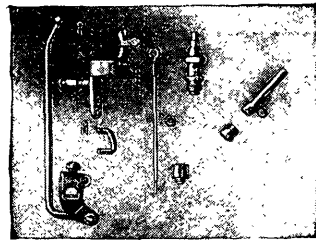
Assemble parts controlling high speed circuit. Check pump arm and countershaft for wear on shaft, and for loose lever. If metering rod shows wear, replace both rod and jet. New needle should be used whenever carburetors are serviced. Check anti-percolator valve closely for dirt and wear
